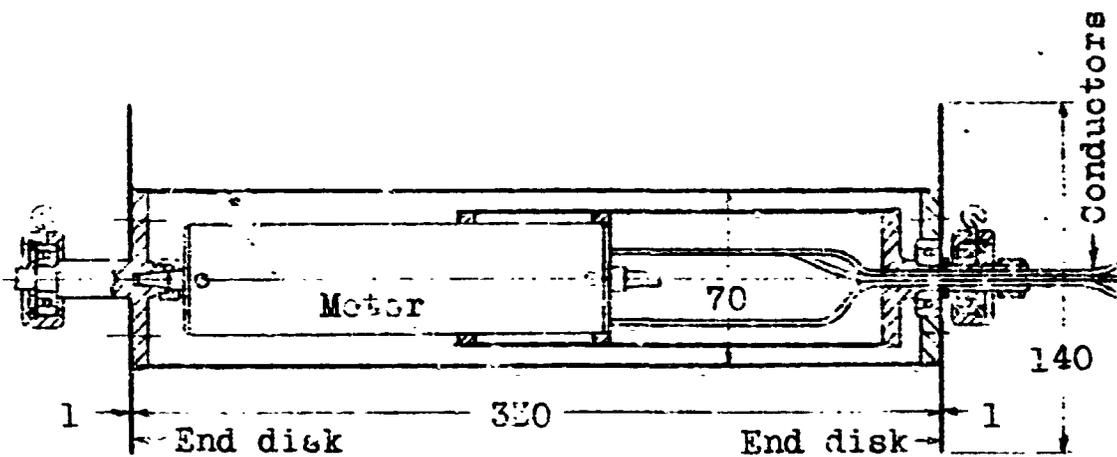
Rotating cylinder with built-in motor for the more accurate wind tunnel tests.
